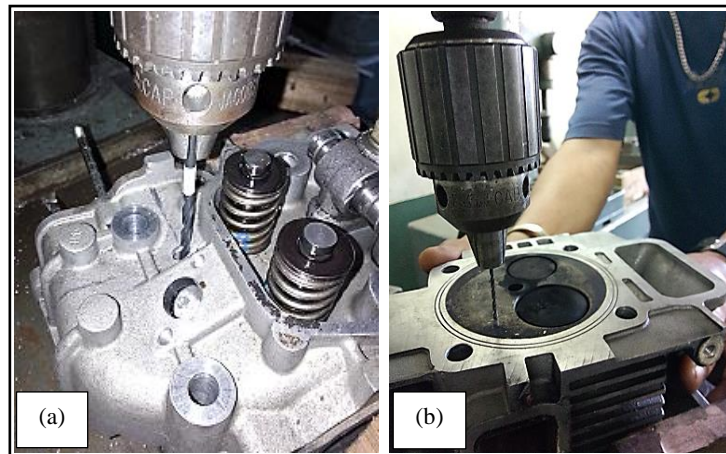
Drilling a hole: a) on the top of the cylinder head, and b) on the bottom of the cylinder head
